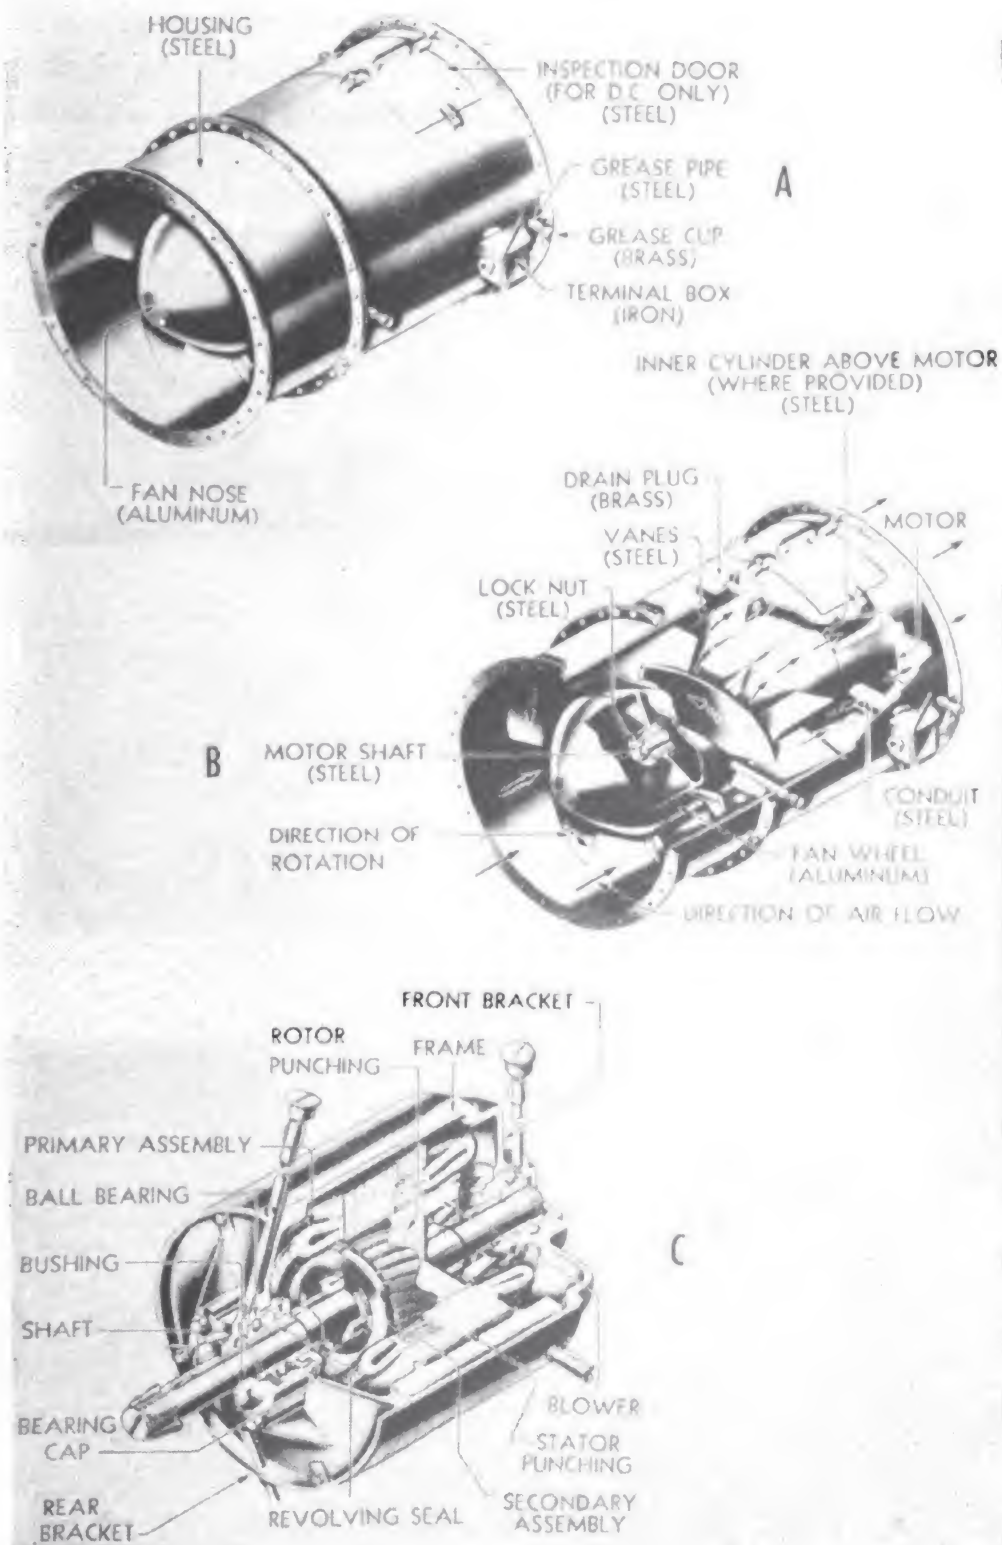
Vaneaxial ventilating fan: (A) exterior view; (B) cutaway view; (C) cutaway view of the fan's motor.
